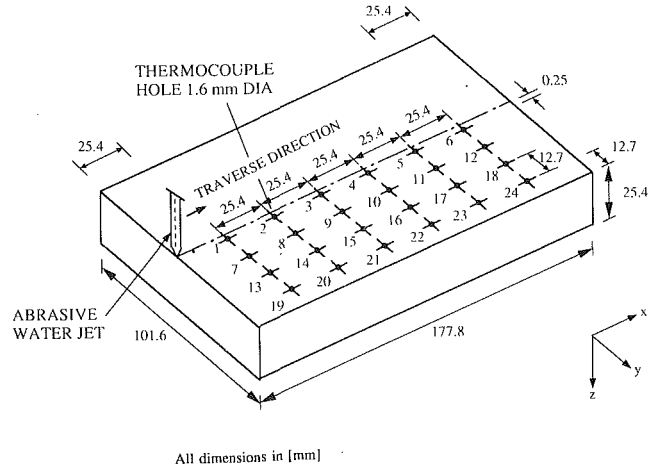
Thermocouple positions in workpiece configuration No. 1
